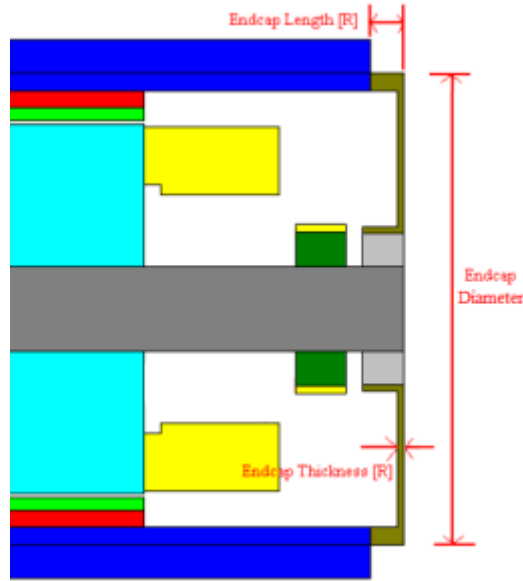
Axial view of the rear part of the machine. End-cap dimensions. Image obtained from Motor-CAD.
